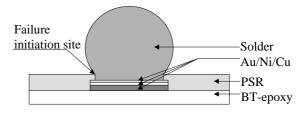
Schematic illustration of a solder bump reflowed on Au/Ni/Cu UBM.
